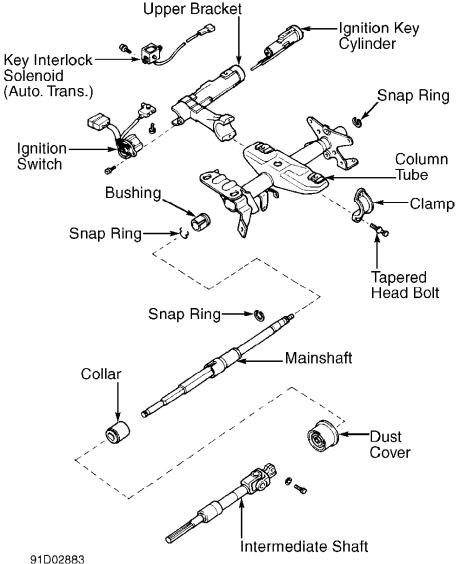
Exploded View Of Steering Column Courtesy of Toyota Motor Sales, U.S.A., Inc.
